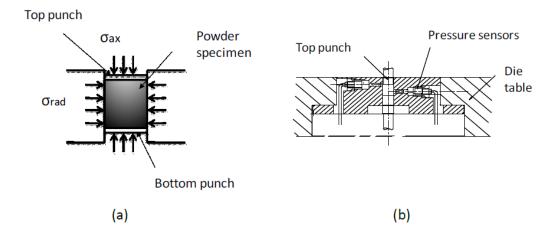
(a) Closed die section view, (b) Instrumented die section view (Shang,
